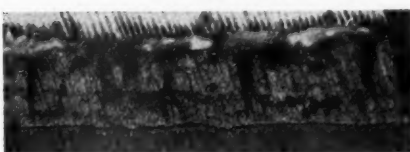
Same wire as Fig. 23, wrapped on mandrel 3 times diameter of wire. Coating cracked.
